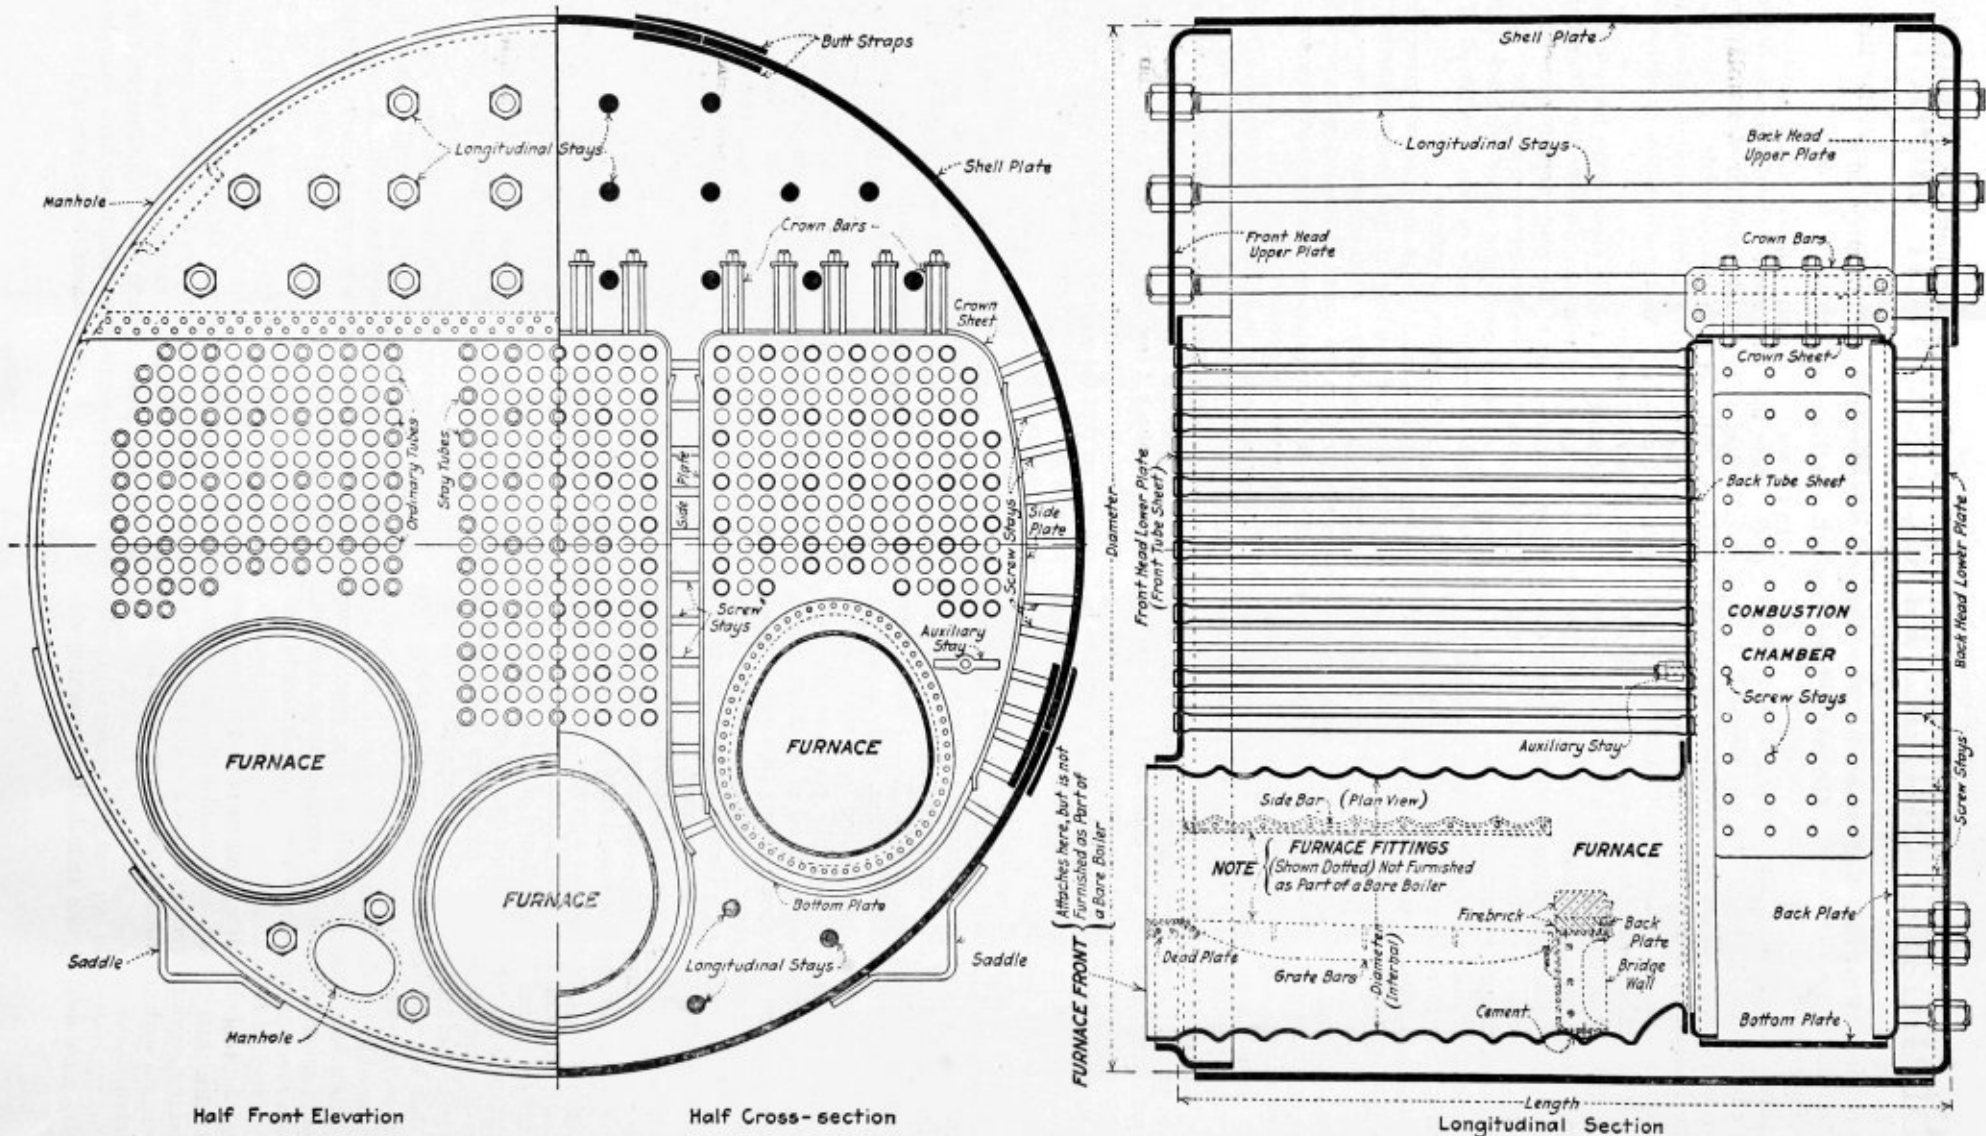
Standard Single Ended Scotch Marine Boiler Built by the Federal Shipbuilding Company, Showing Bare Boiler, Without Fittings or Accessories. This Drawing, in Conjunction With Tables Giving Diameter of Boiler, Number of Furnaces and Heating Surface, as Well as the Details of Construction, Provides an Accurate Description of All Standard Size Boilers Built by the Company
